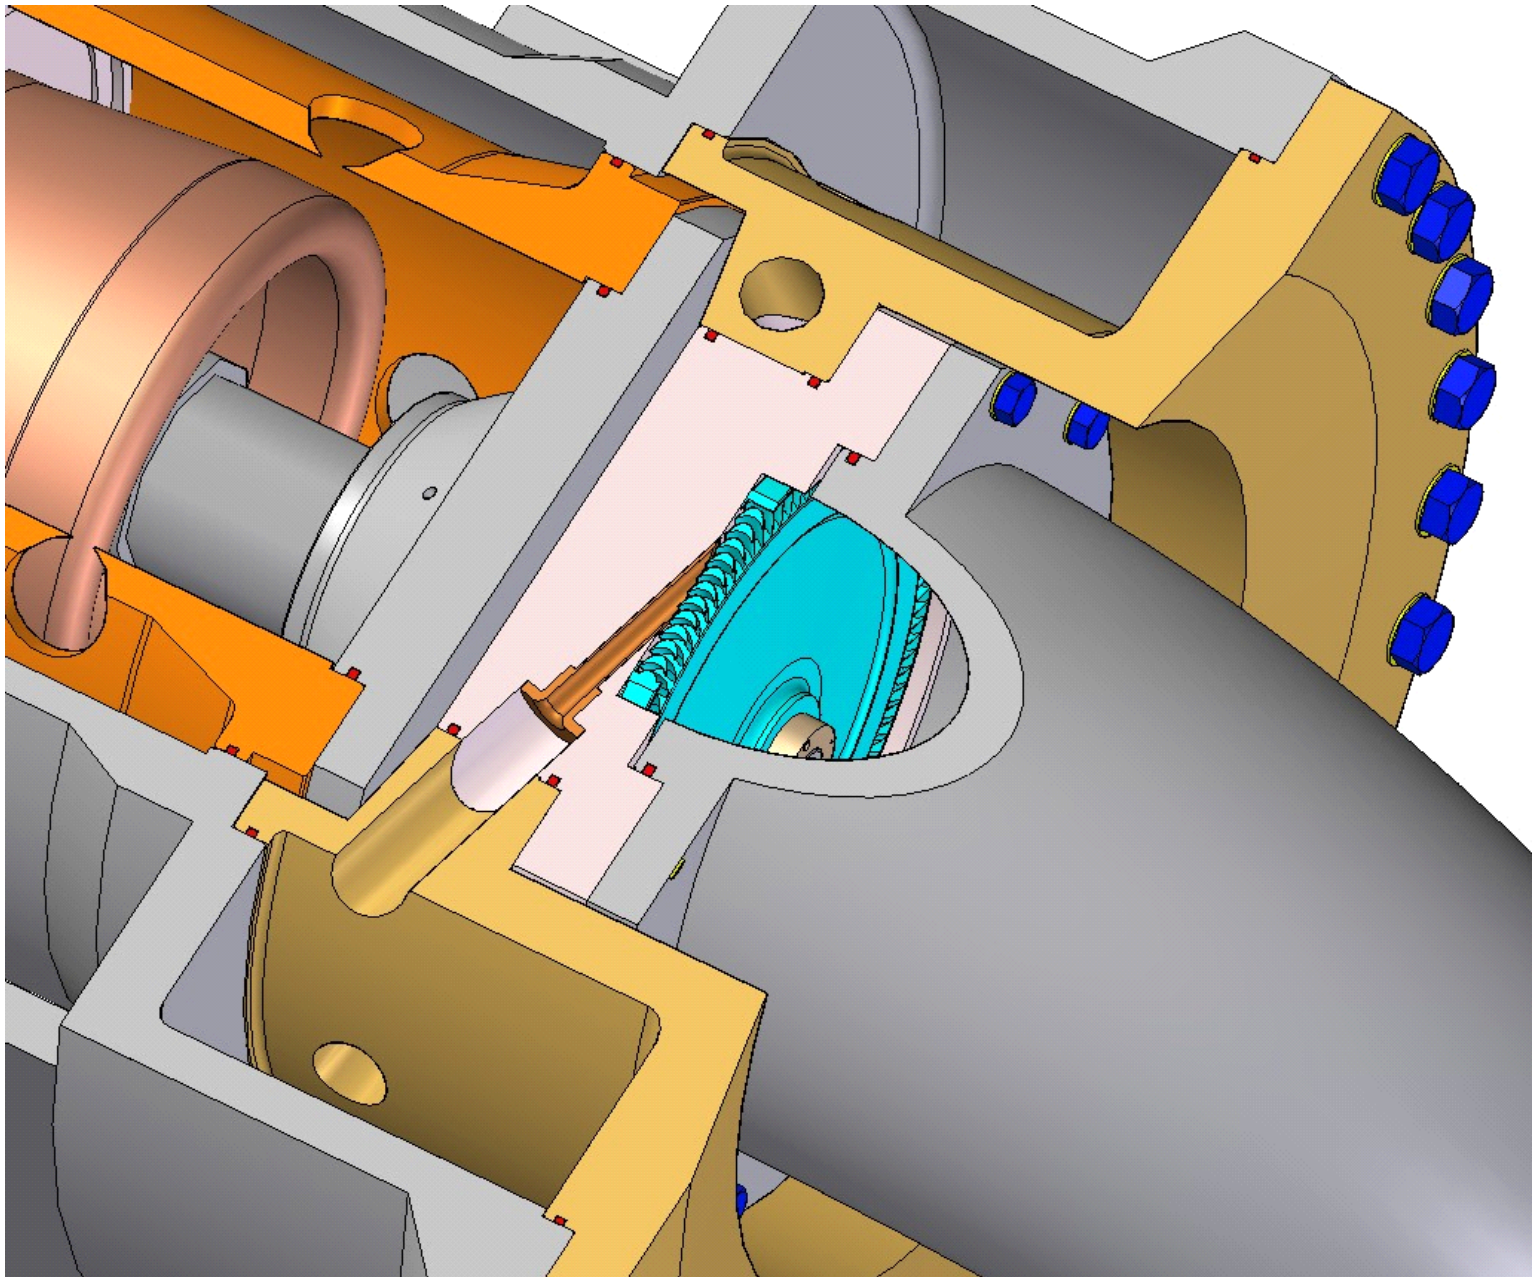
Cut Away of VPT Showing Nozzle Insert and Axial Turbine Wheel
